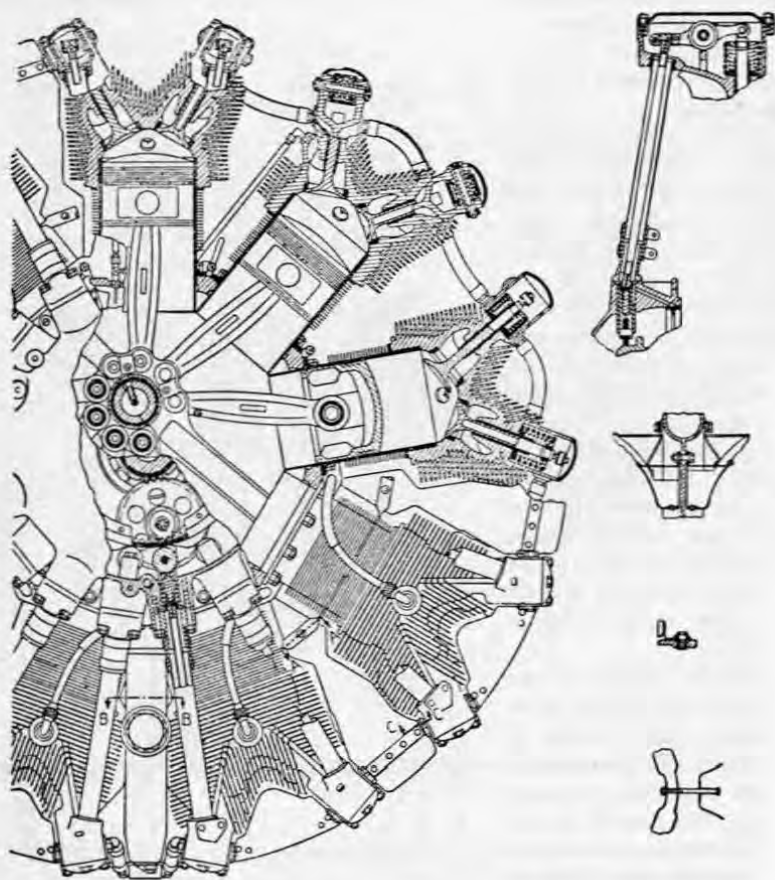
Transverse section of a radial aircraft engine (Lycoming). Note the valve gear.
